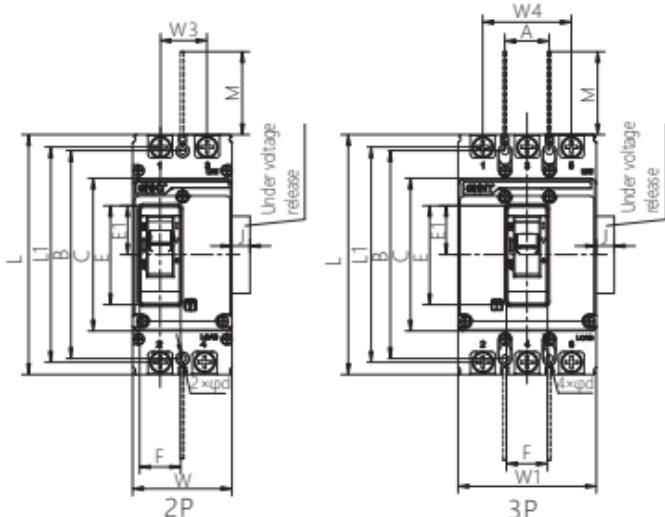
NXM-63~250 front-panel wiring overall and installation dimension
